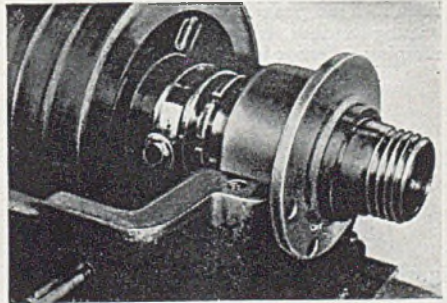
(above).—Aluminium bearing for rolling mill. Fig. 16 (right).—Grinding machine with three aluminium bearings.
